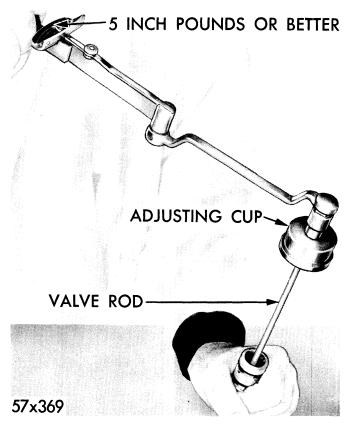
Testing Torque of Adjusting Cup on Valve Rod
